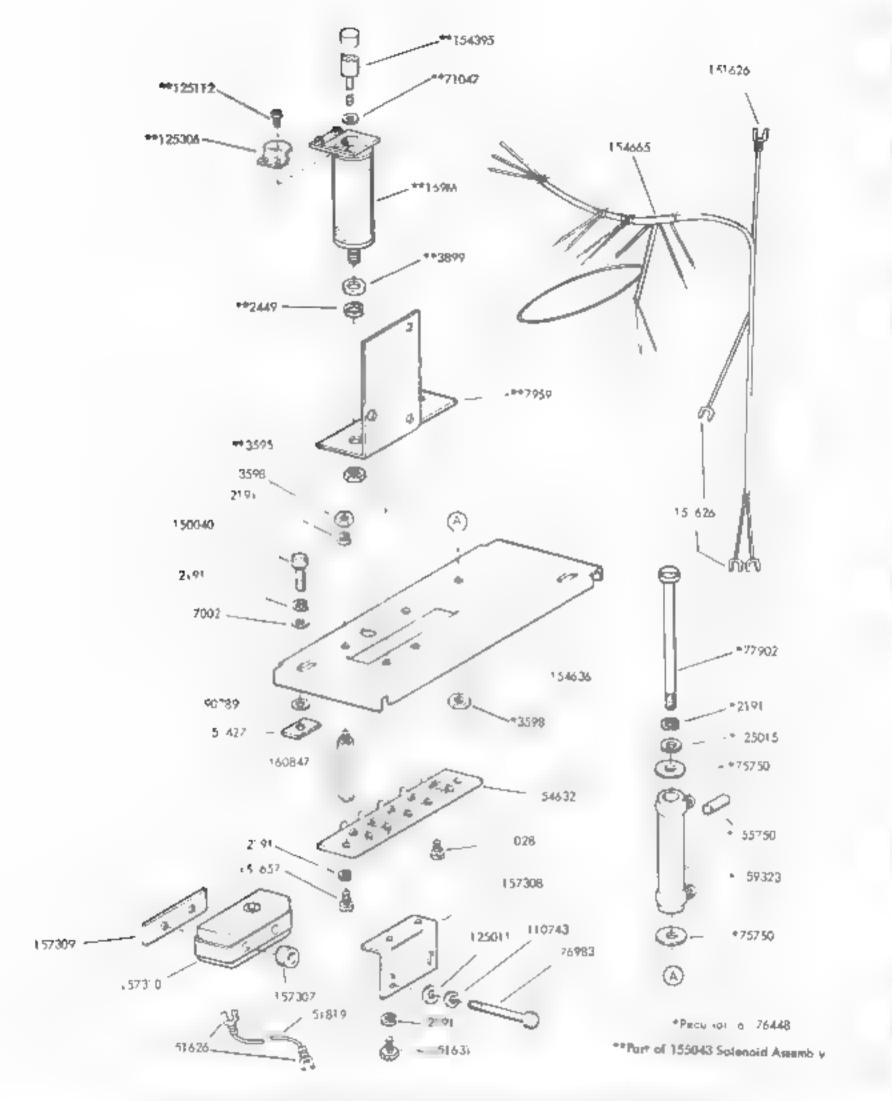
152332 AND 176448 RELAY MOTOR CONTROL ASSEMBLIES
